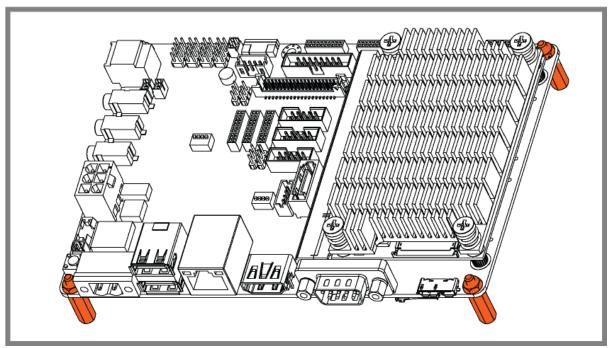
standoffs and bolts mounted in the four corners of the carrier board
